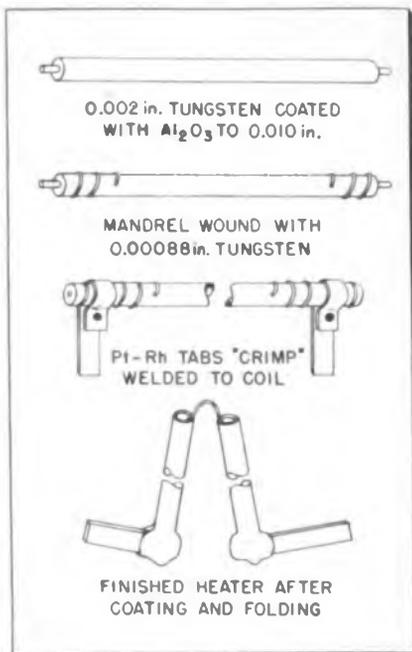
26.5 volt heater made by crimp welding to reduce heat transfer to coil wire
